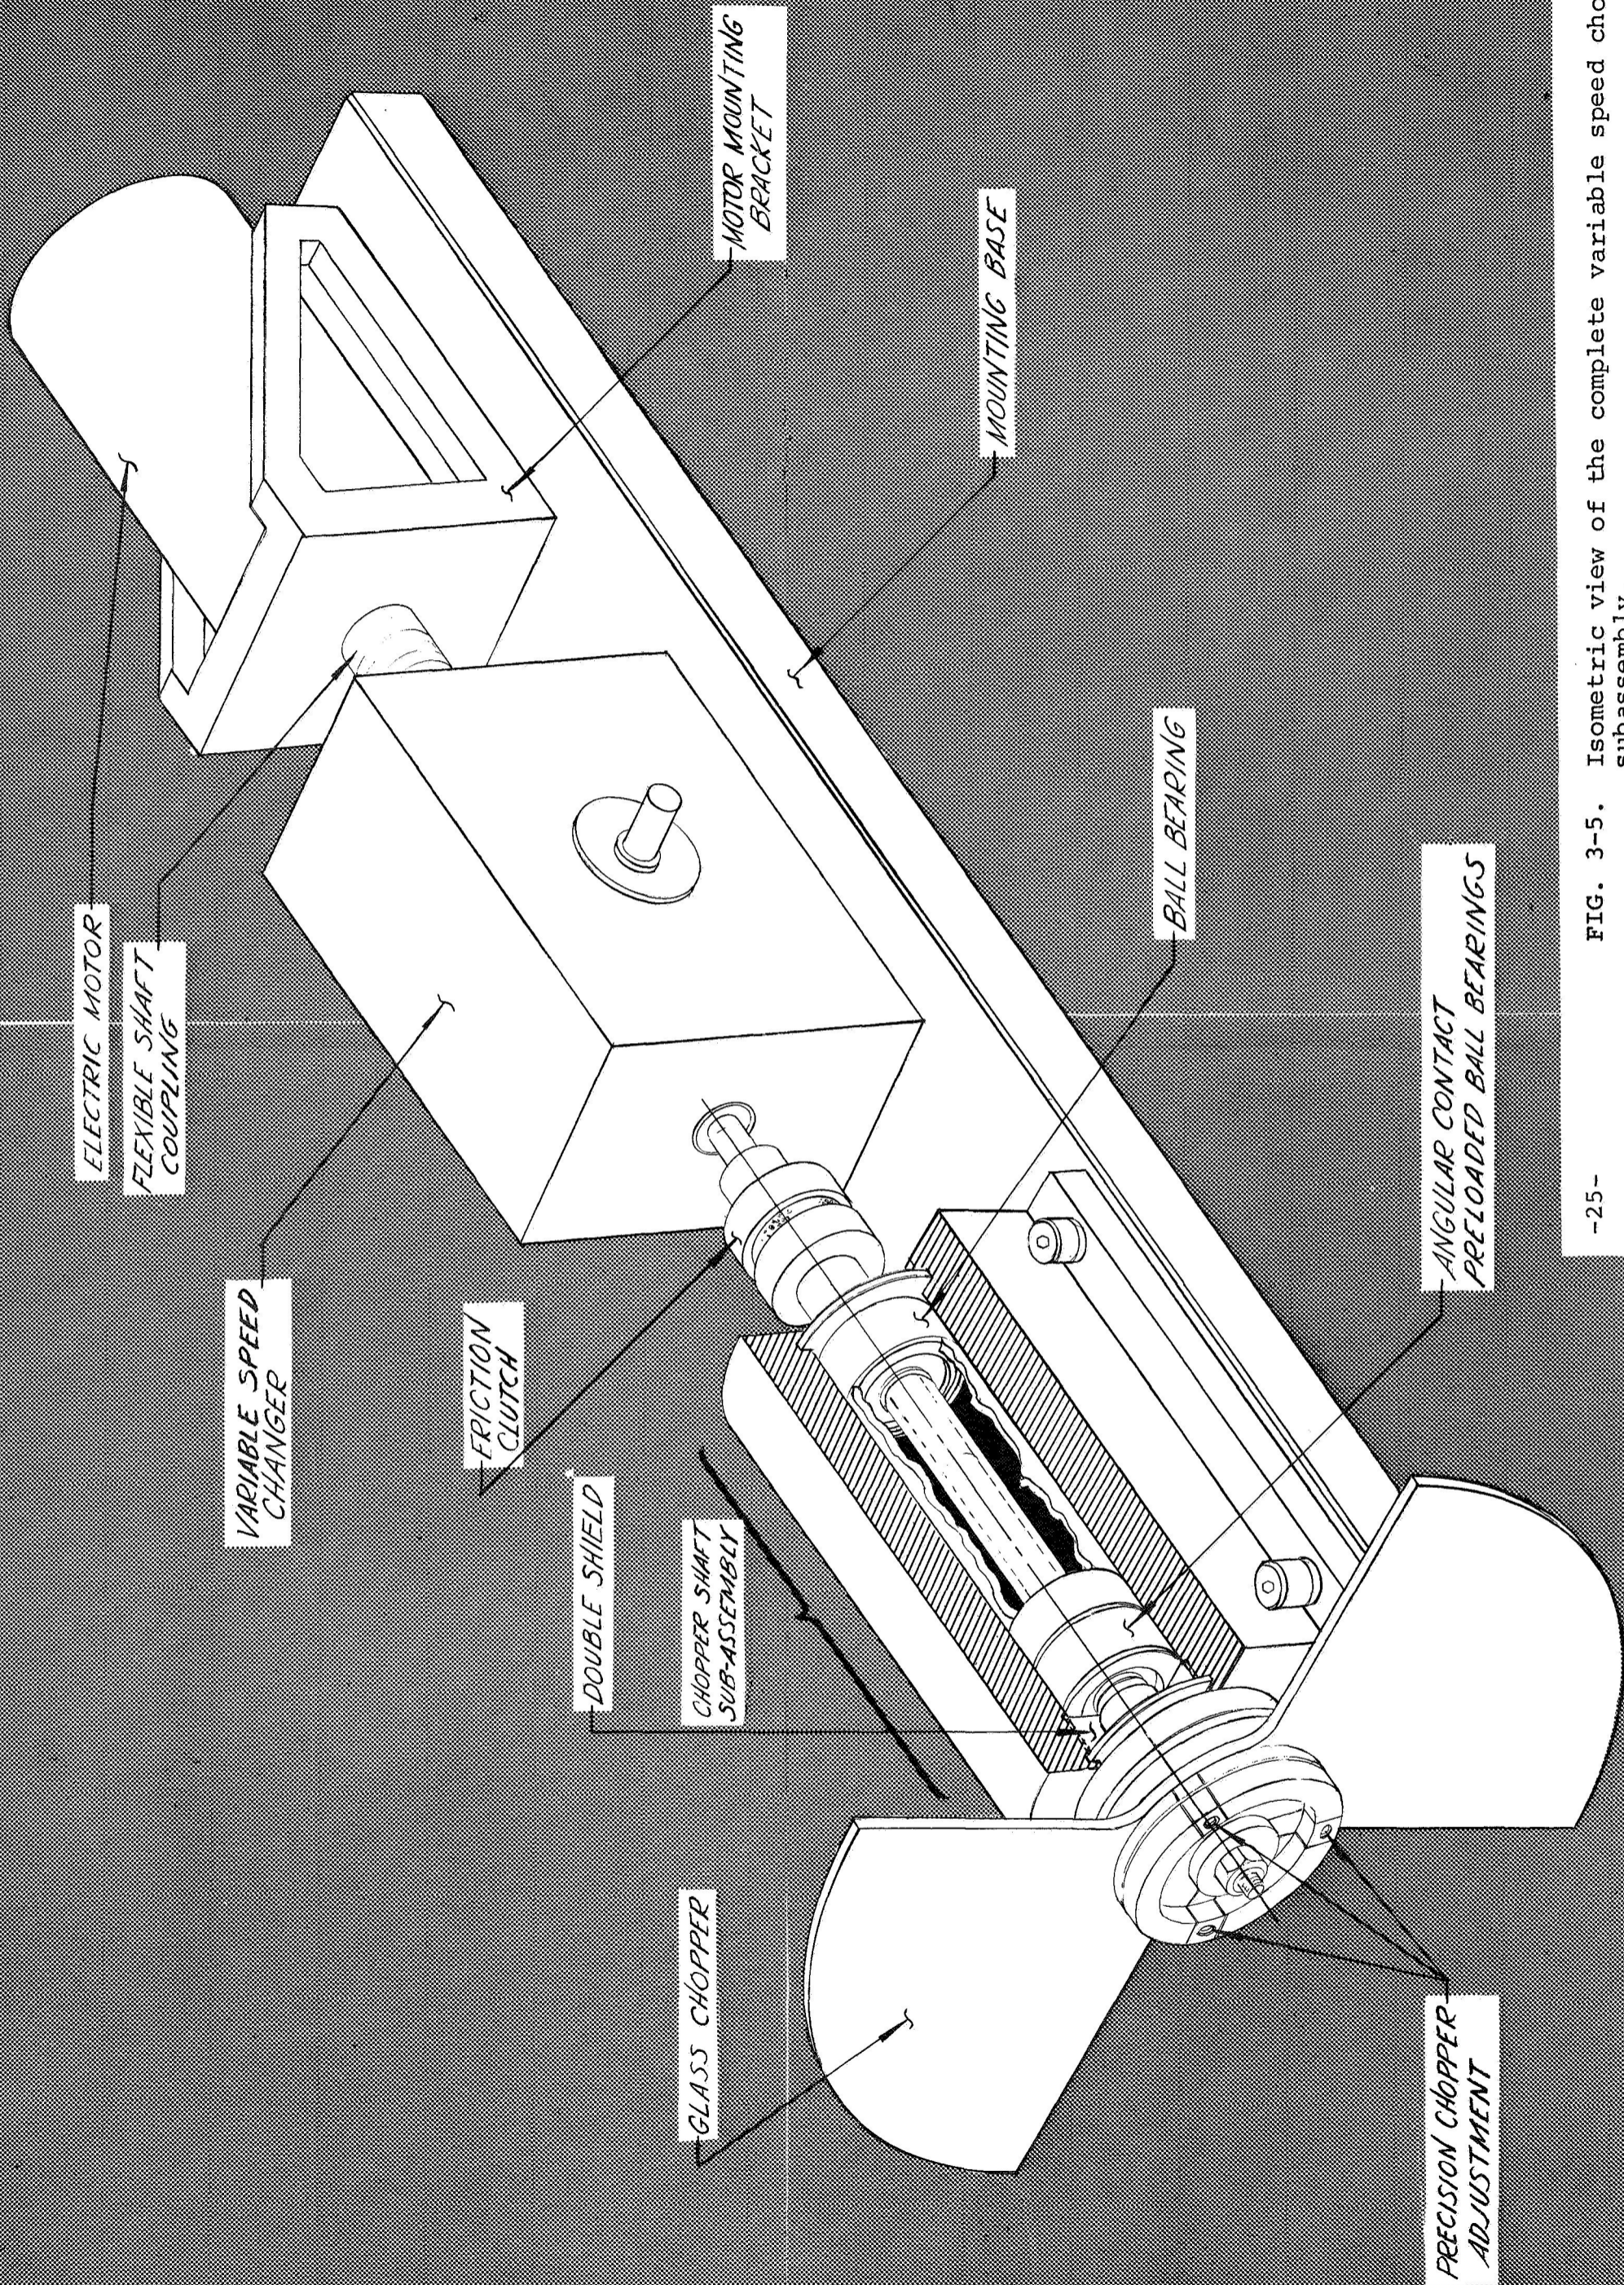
Isometric view of the complete variable speed chopper subassembly.
